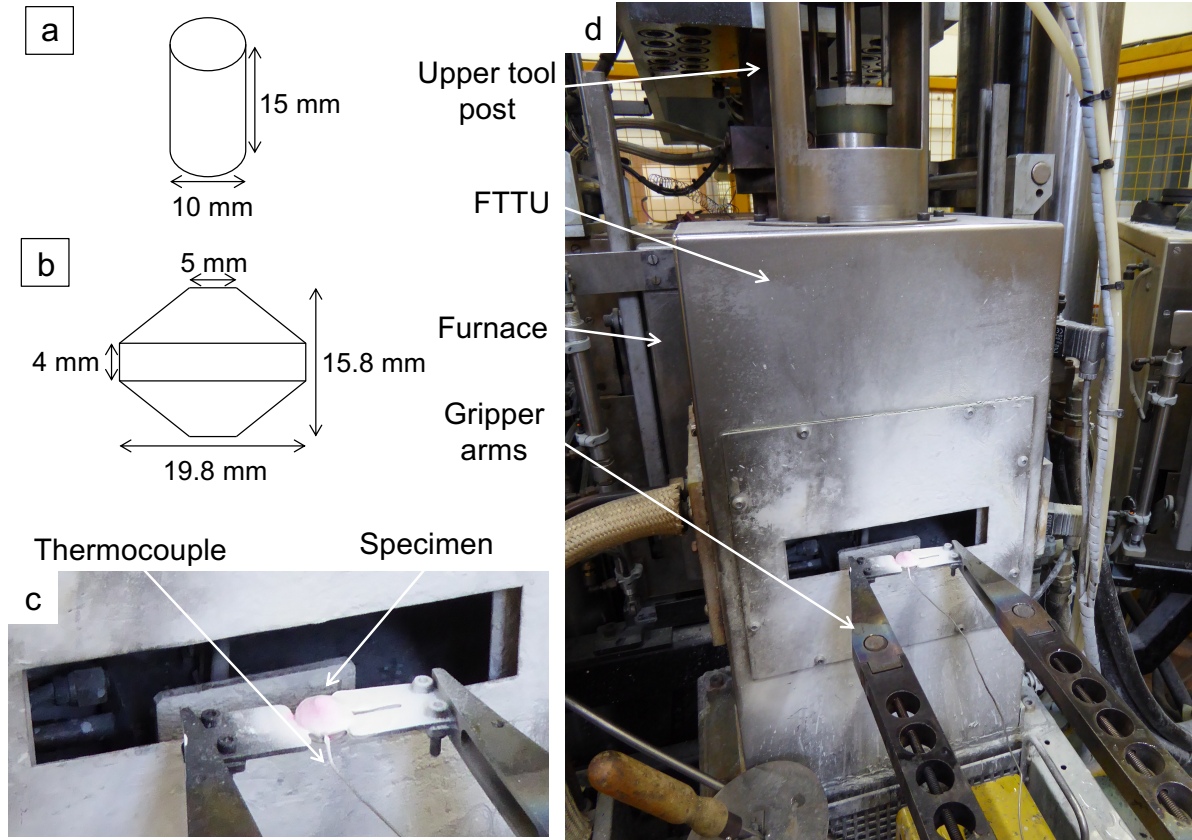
Thermomechanical compression testing: (a) dimensions of cylindrical specimens, (b) dimensions of double truncated cone specimens, (d) annotated photograph of the thermomechanical compression machine, with (c) close-up of a specimen in the gripper arms
